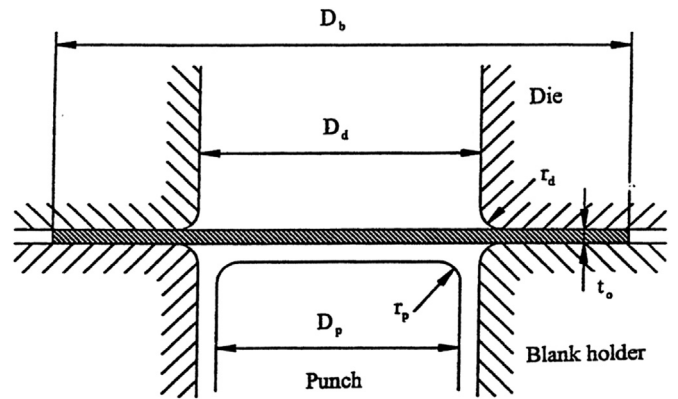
Al2090 cup forming example. Definition of tools and blank geometry.
